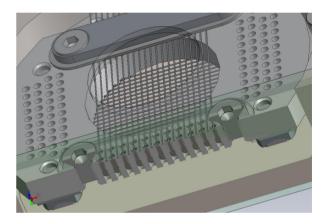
The Wire Grid with its ceramic assembly and grub screws for every single wire.
